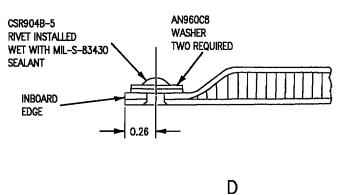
Main Landing Gear Outboard Door Leading Edge Inboard Corner Repair (Sheet 2)
